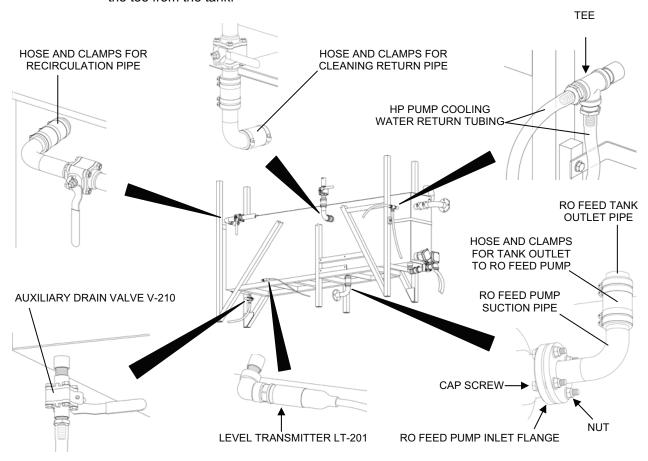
RO Feed Tank Front and Bottom Connections Removal.
